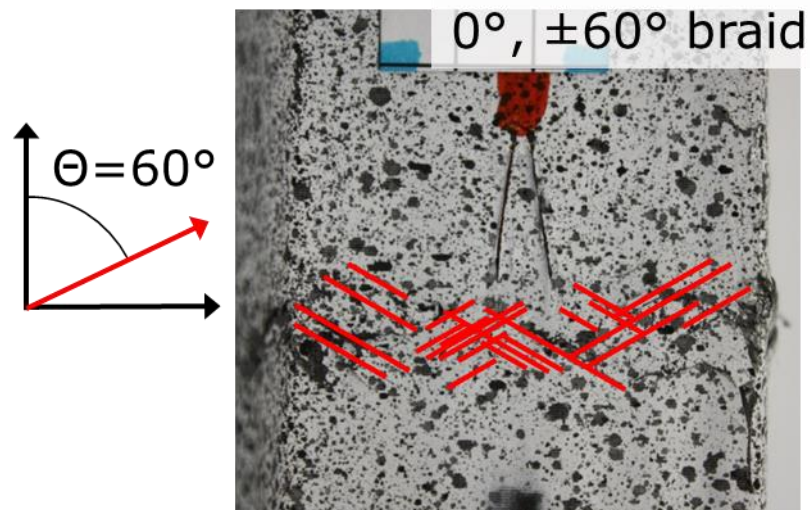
TBC 60 panel localized cracks highlighted in red on a stiffener section
